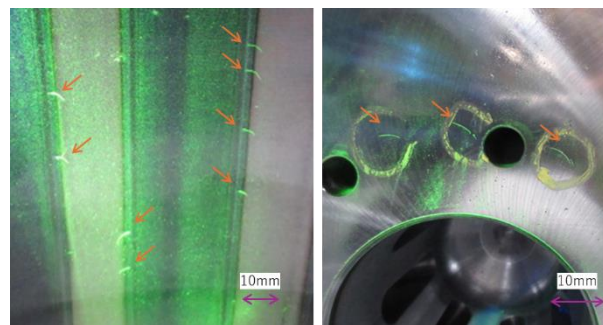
Cracks on laser hardened surface. Left: crosshead pin, right: VCR piston
